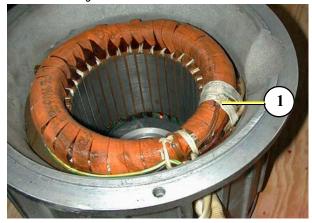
TThermo-switch at exhaust connection
